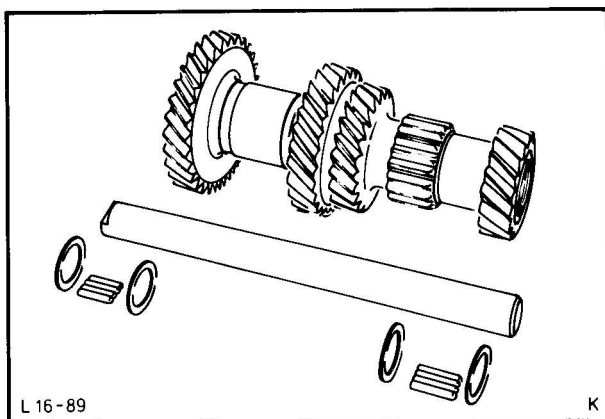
Countershaft gear train with shaft, spacer shims and needle rollers
